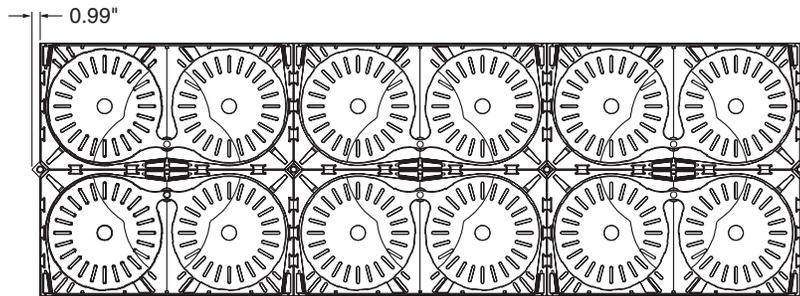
Floor Layout - Zone 2 - Electro-Tyte RC Battery Stand Only
